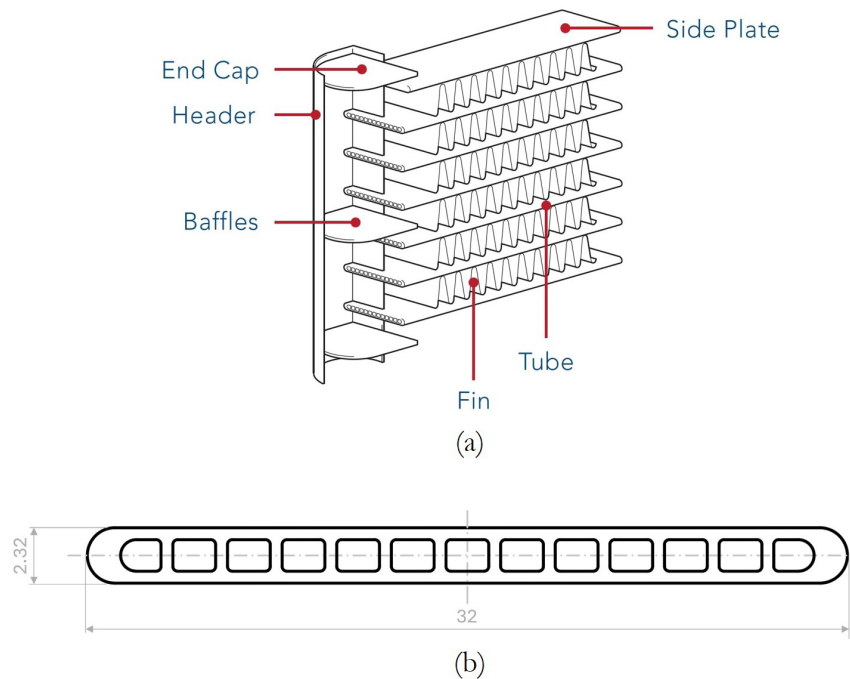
(a) Schematic representation of a typical microchannel heat exchanger, highlighting the main components. (b) Cross-sectional geometry of the multi-port tube investigated in this study (dimensions in millimetres).
